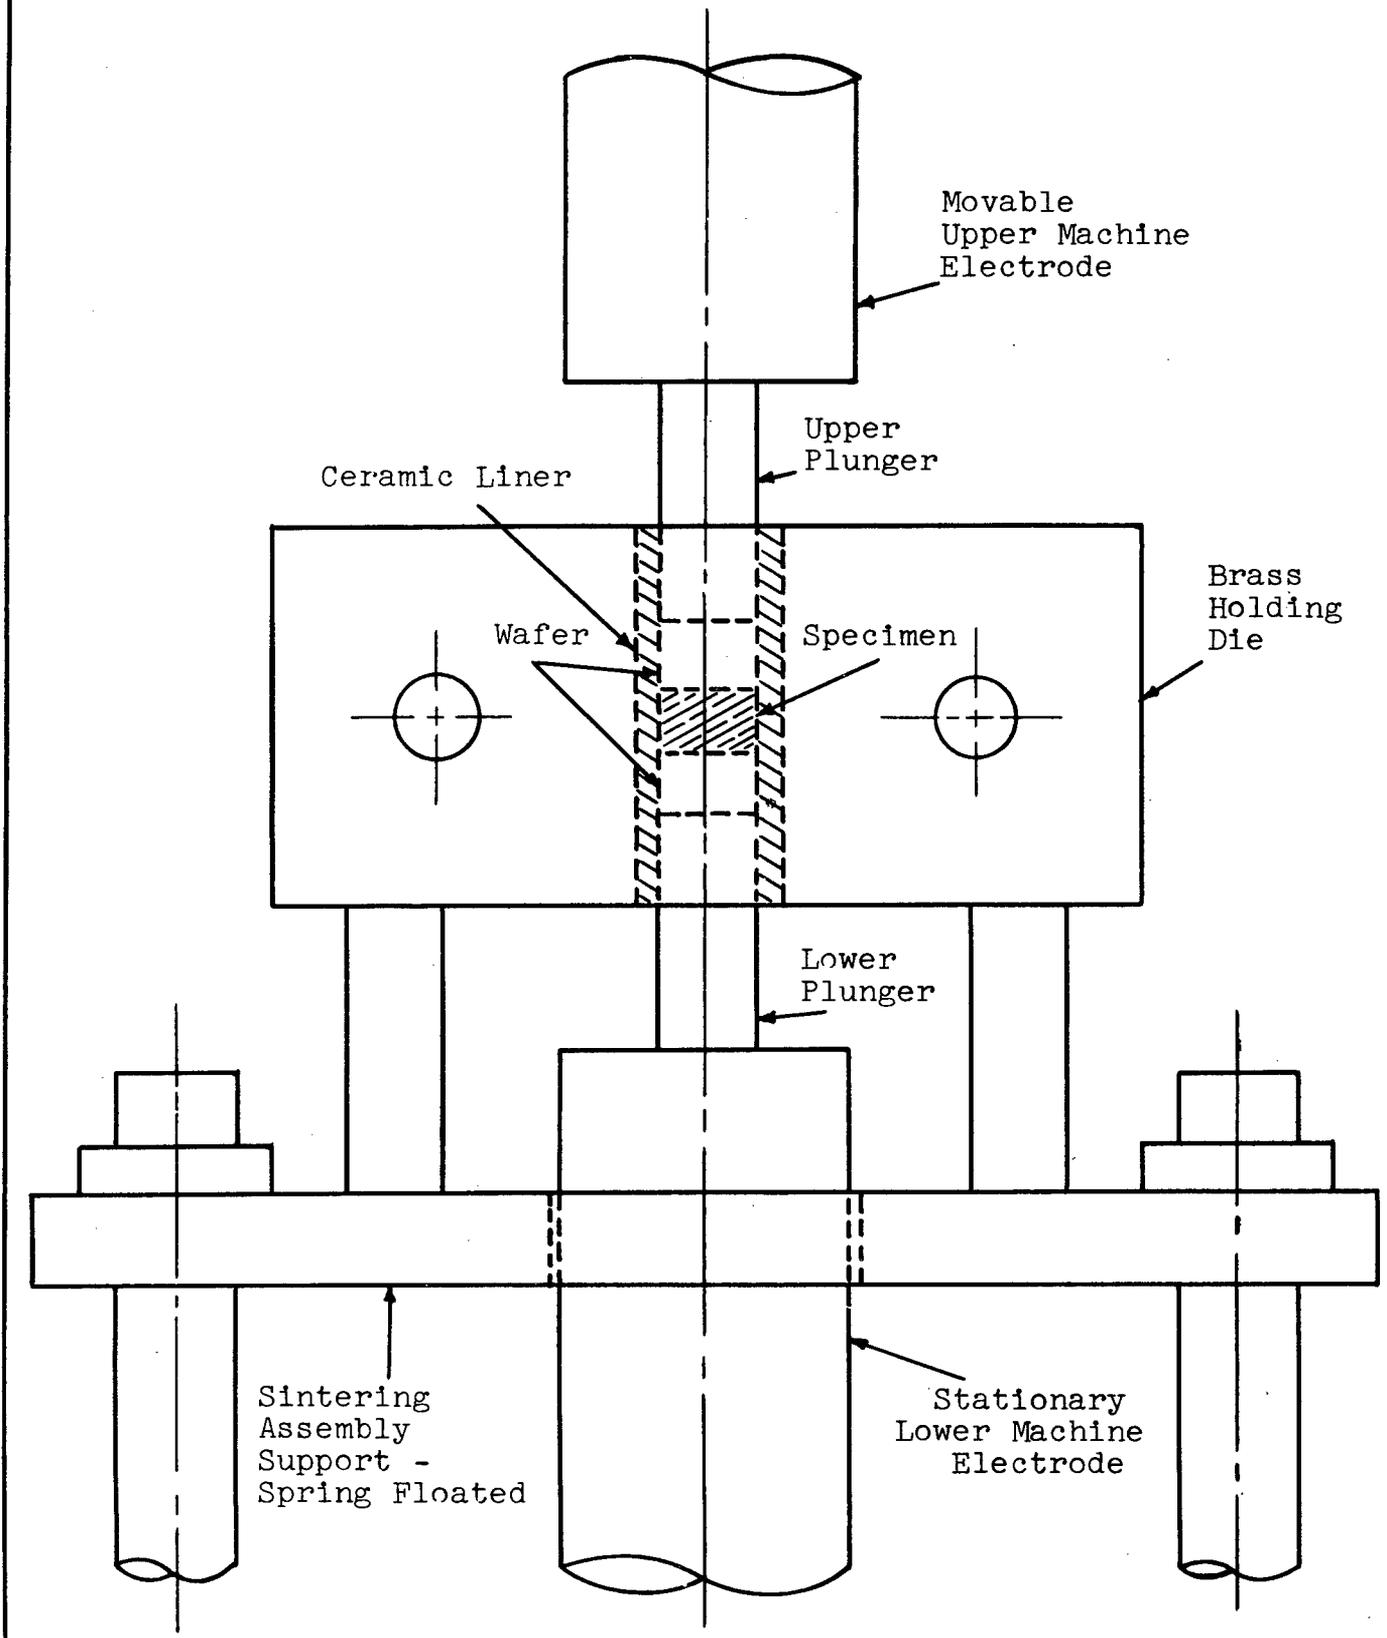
ASSEMBLY FOR FLASH SINTERING
